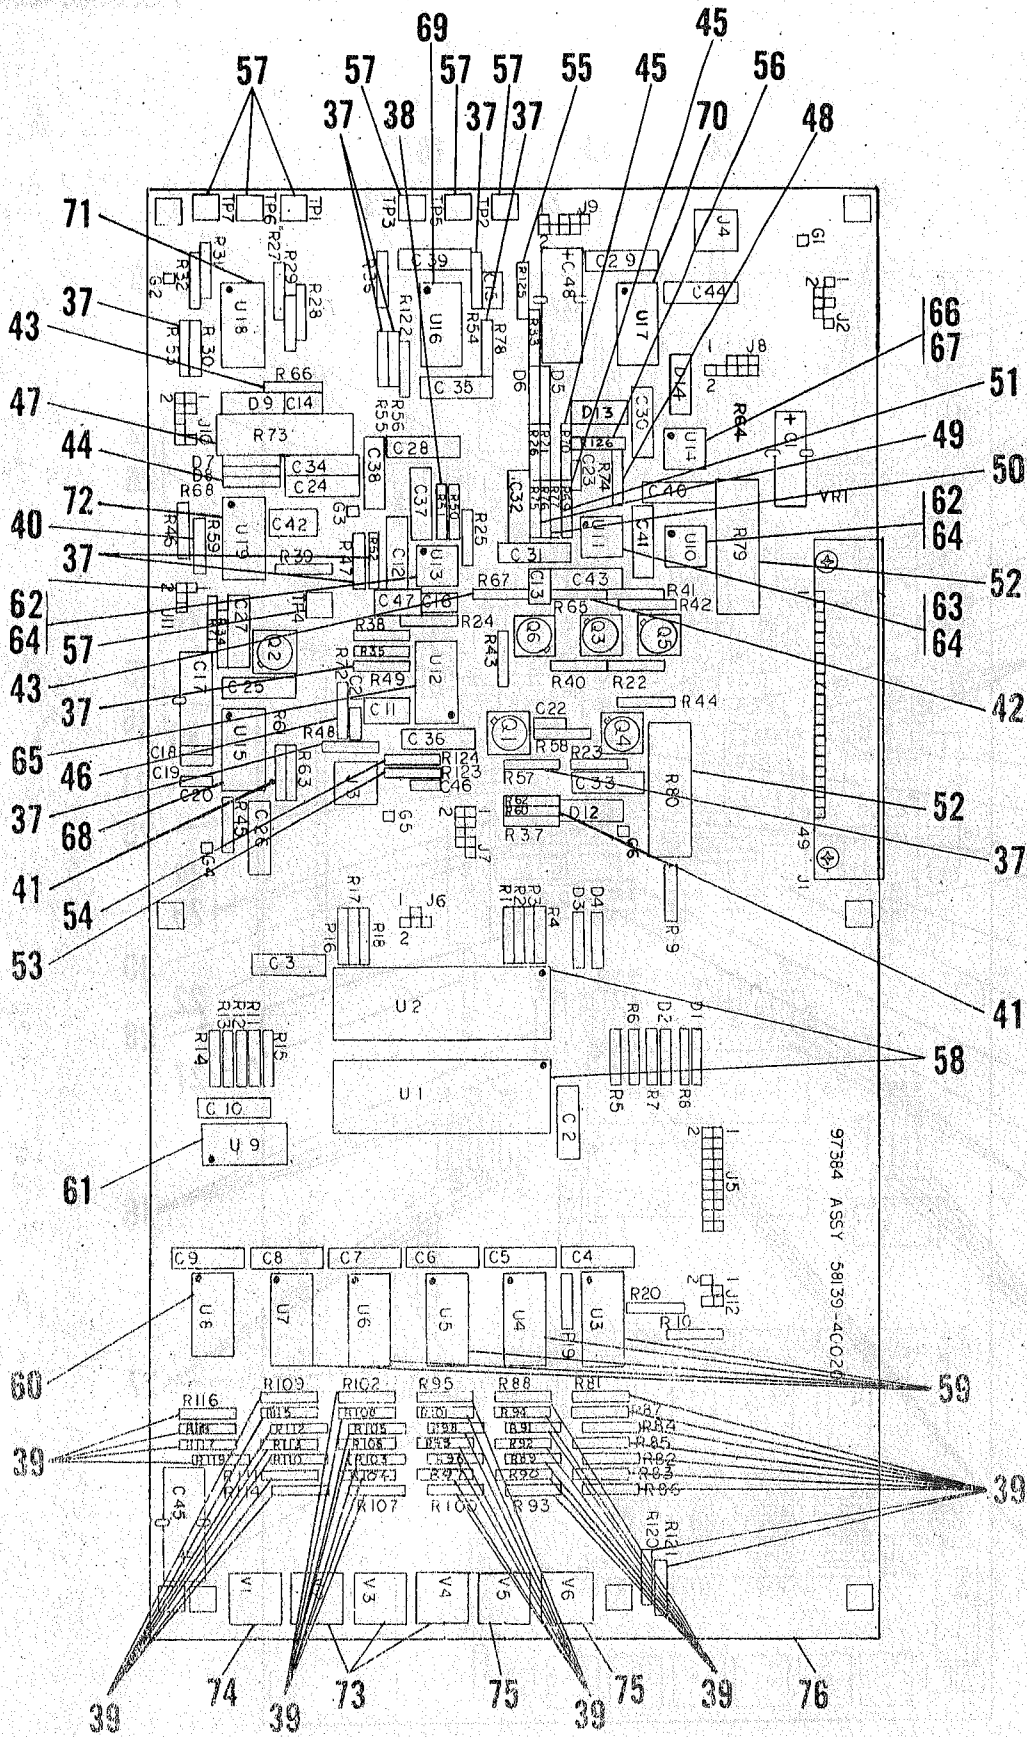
Circuit Card Assembly, Front Panel Interface (Sheet 3 of 4)
